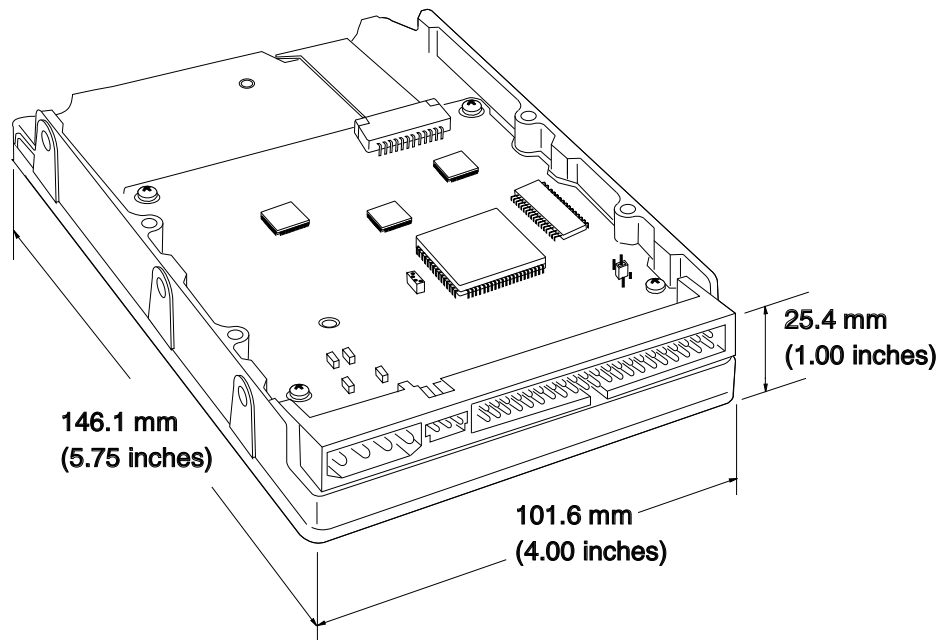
Mechanical Dimensions for Quantum Fireball TM (Two- and Three-Disk) Drives
